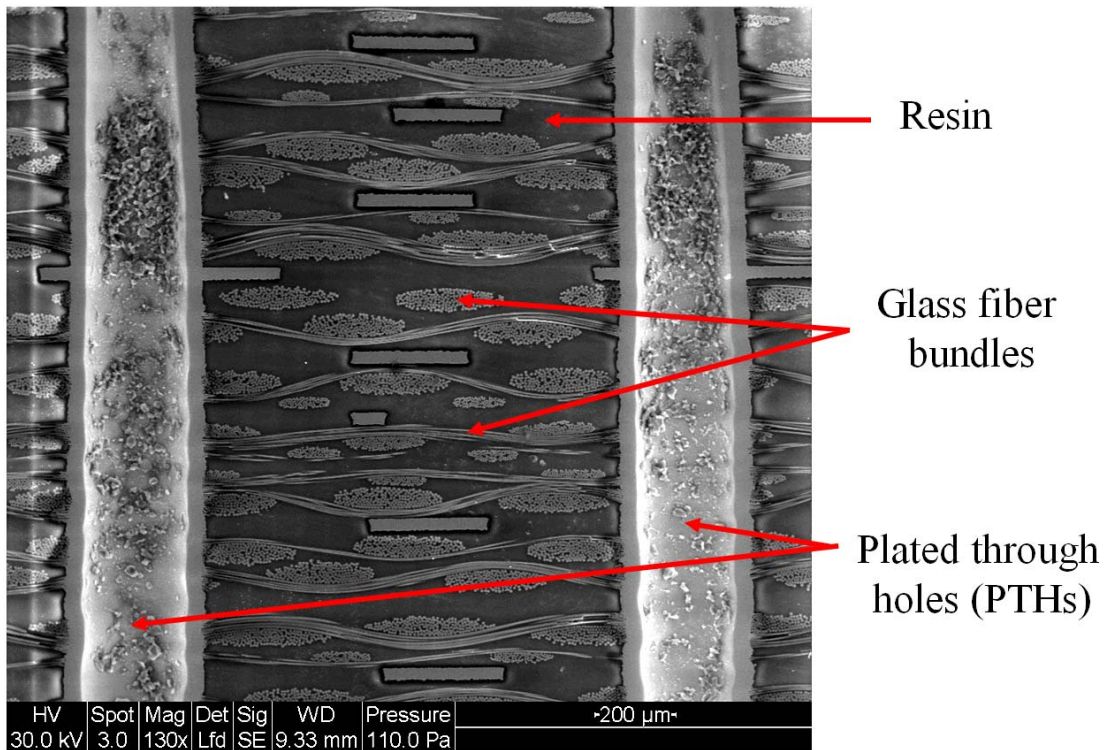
This E-SEM photo shows a cross-section of a printed circuit board containing two PTHs, resin and woven fiber glass.
